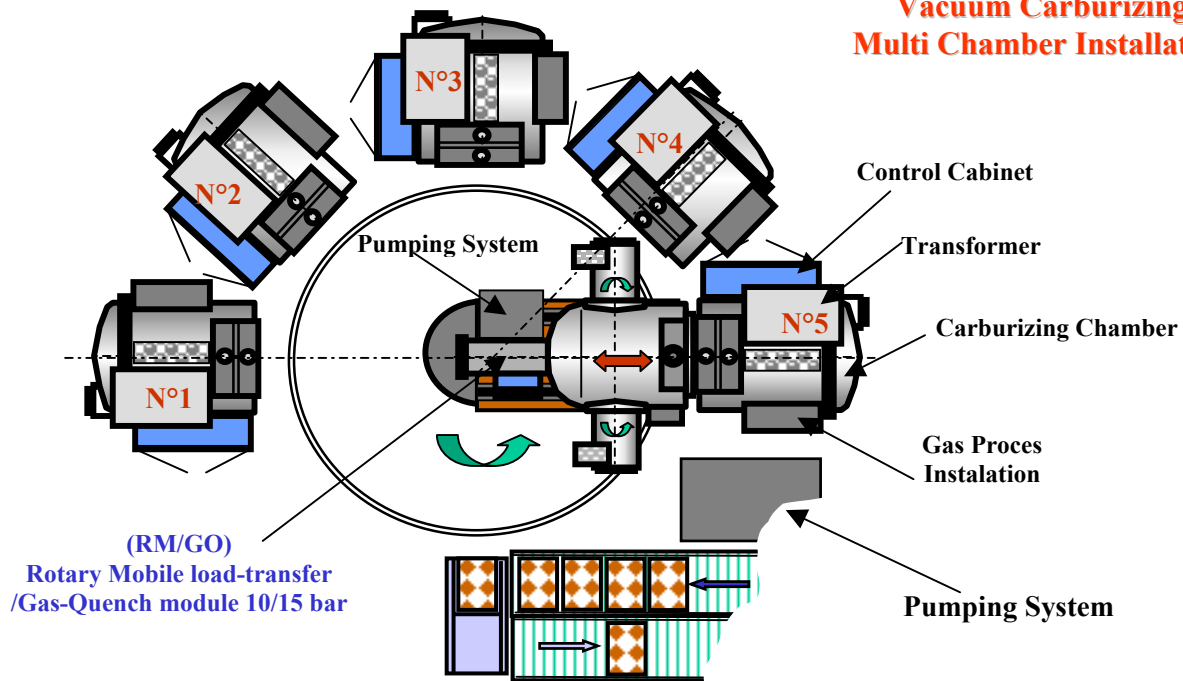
The scheme for a multi chamber system for vacuum carburizing serviced by universal gas cooling chamber
